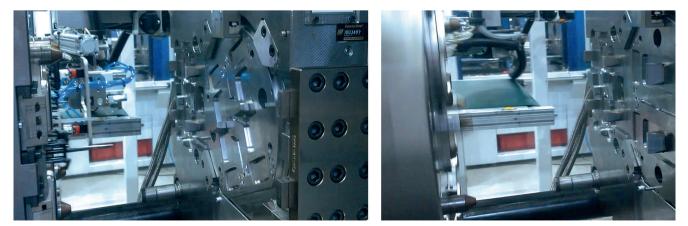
The rotary plate does a 180° turn so that the freshly molded PC light guide ends up on the ejector side in station 2. There the inner contour with assembly elements is formed from black PC+ABS (© KH)
